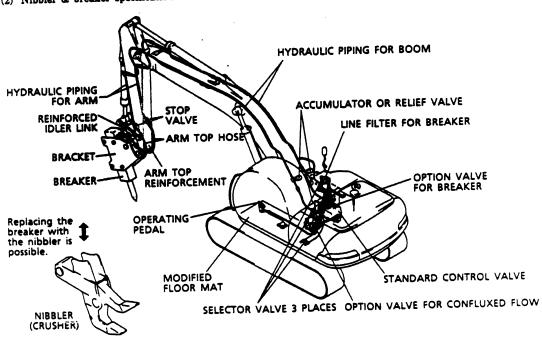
Outside view of Nibbler & Breaker-attached machine
